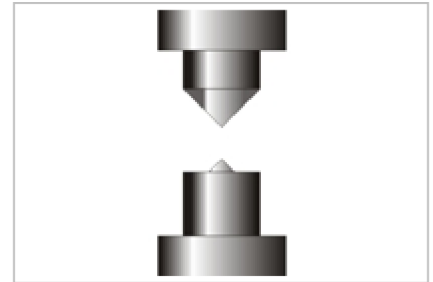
The small cone tip end of the lower Setting Tool faces up. The large cone end of the upper setting tool faces down.
